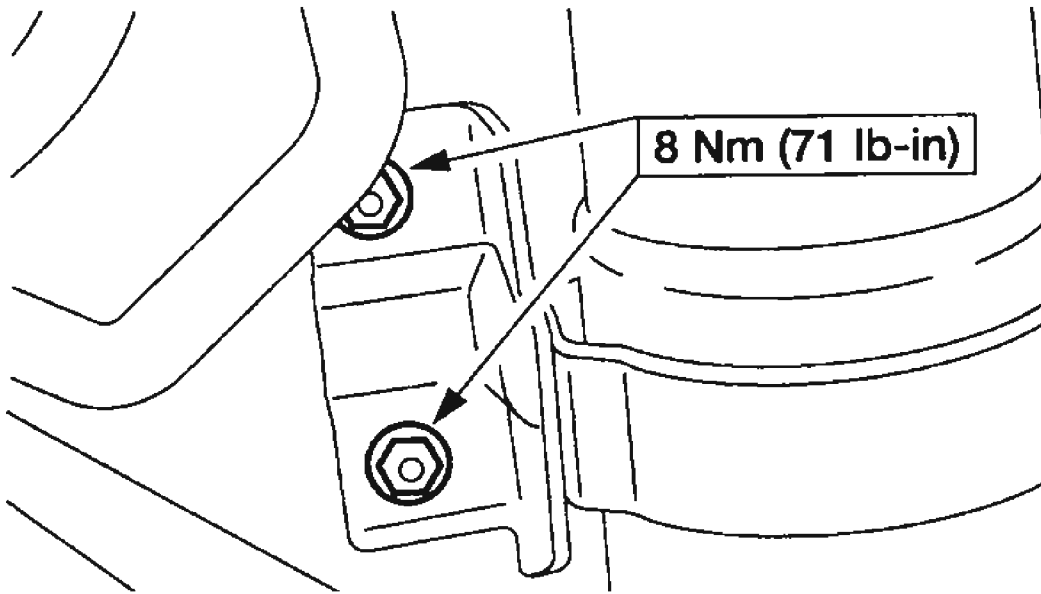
Removing Compressor Manifold & Tube Assembly Mounting Bracket Nuts
